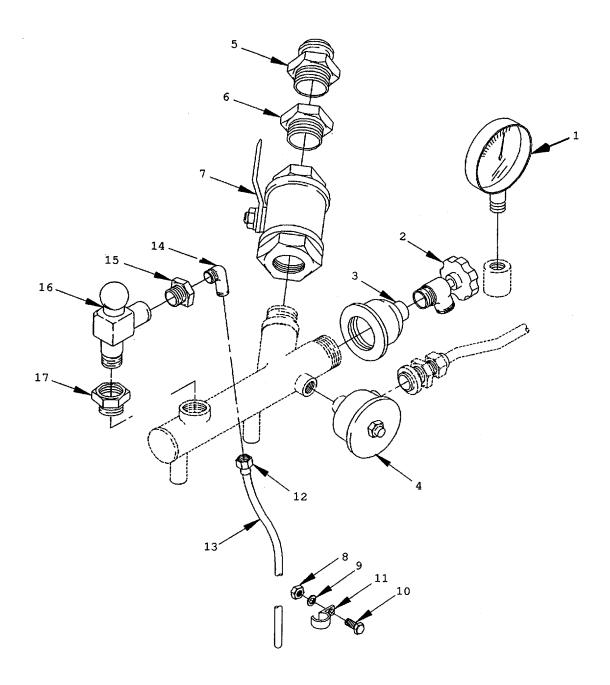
PRESSURE RELIEF VALVE AND THERMOSTAT ASSEMBLY (SHEET 1 OF 2, MODEL M80)
